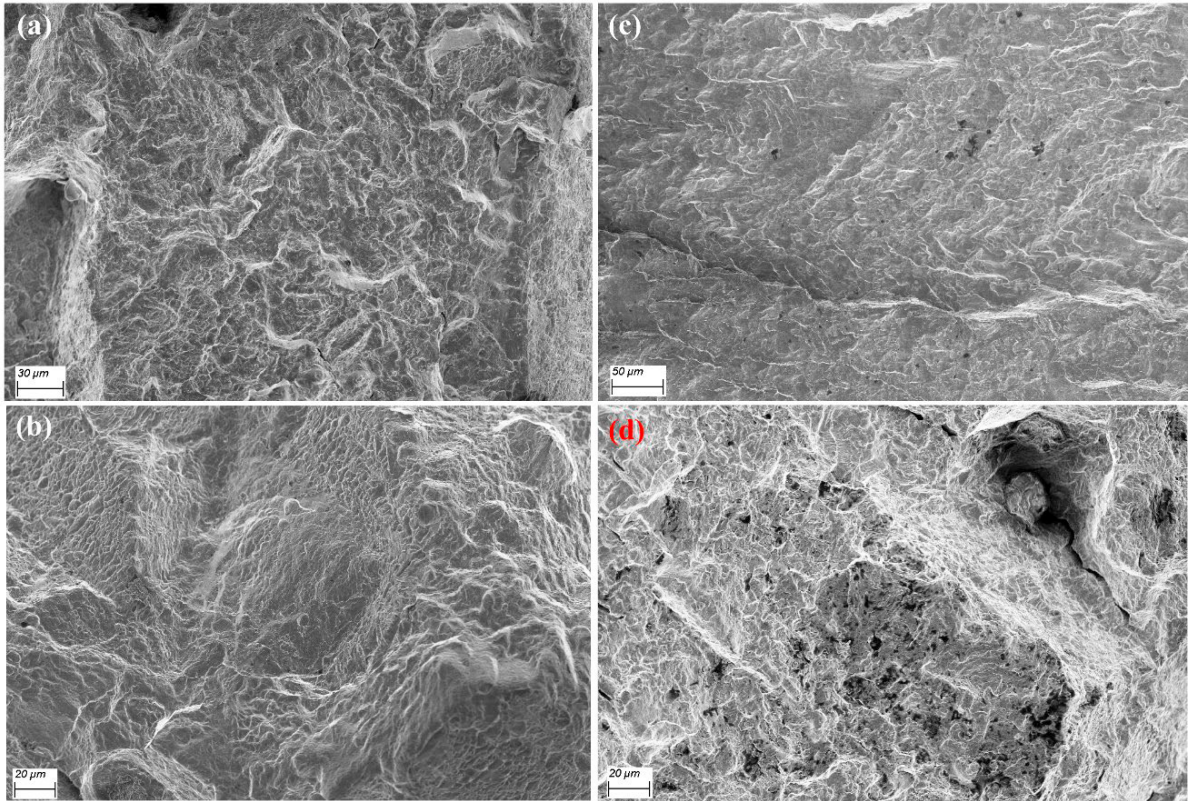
SEM images of the fractured surfaces in (a&b) LDED only and (c&d) LDED+LSPed fractured surface.
